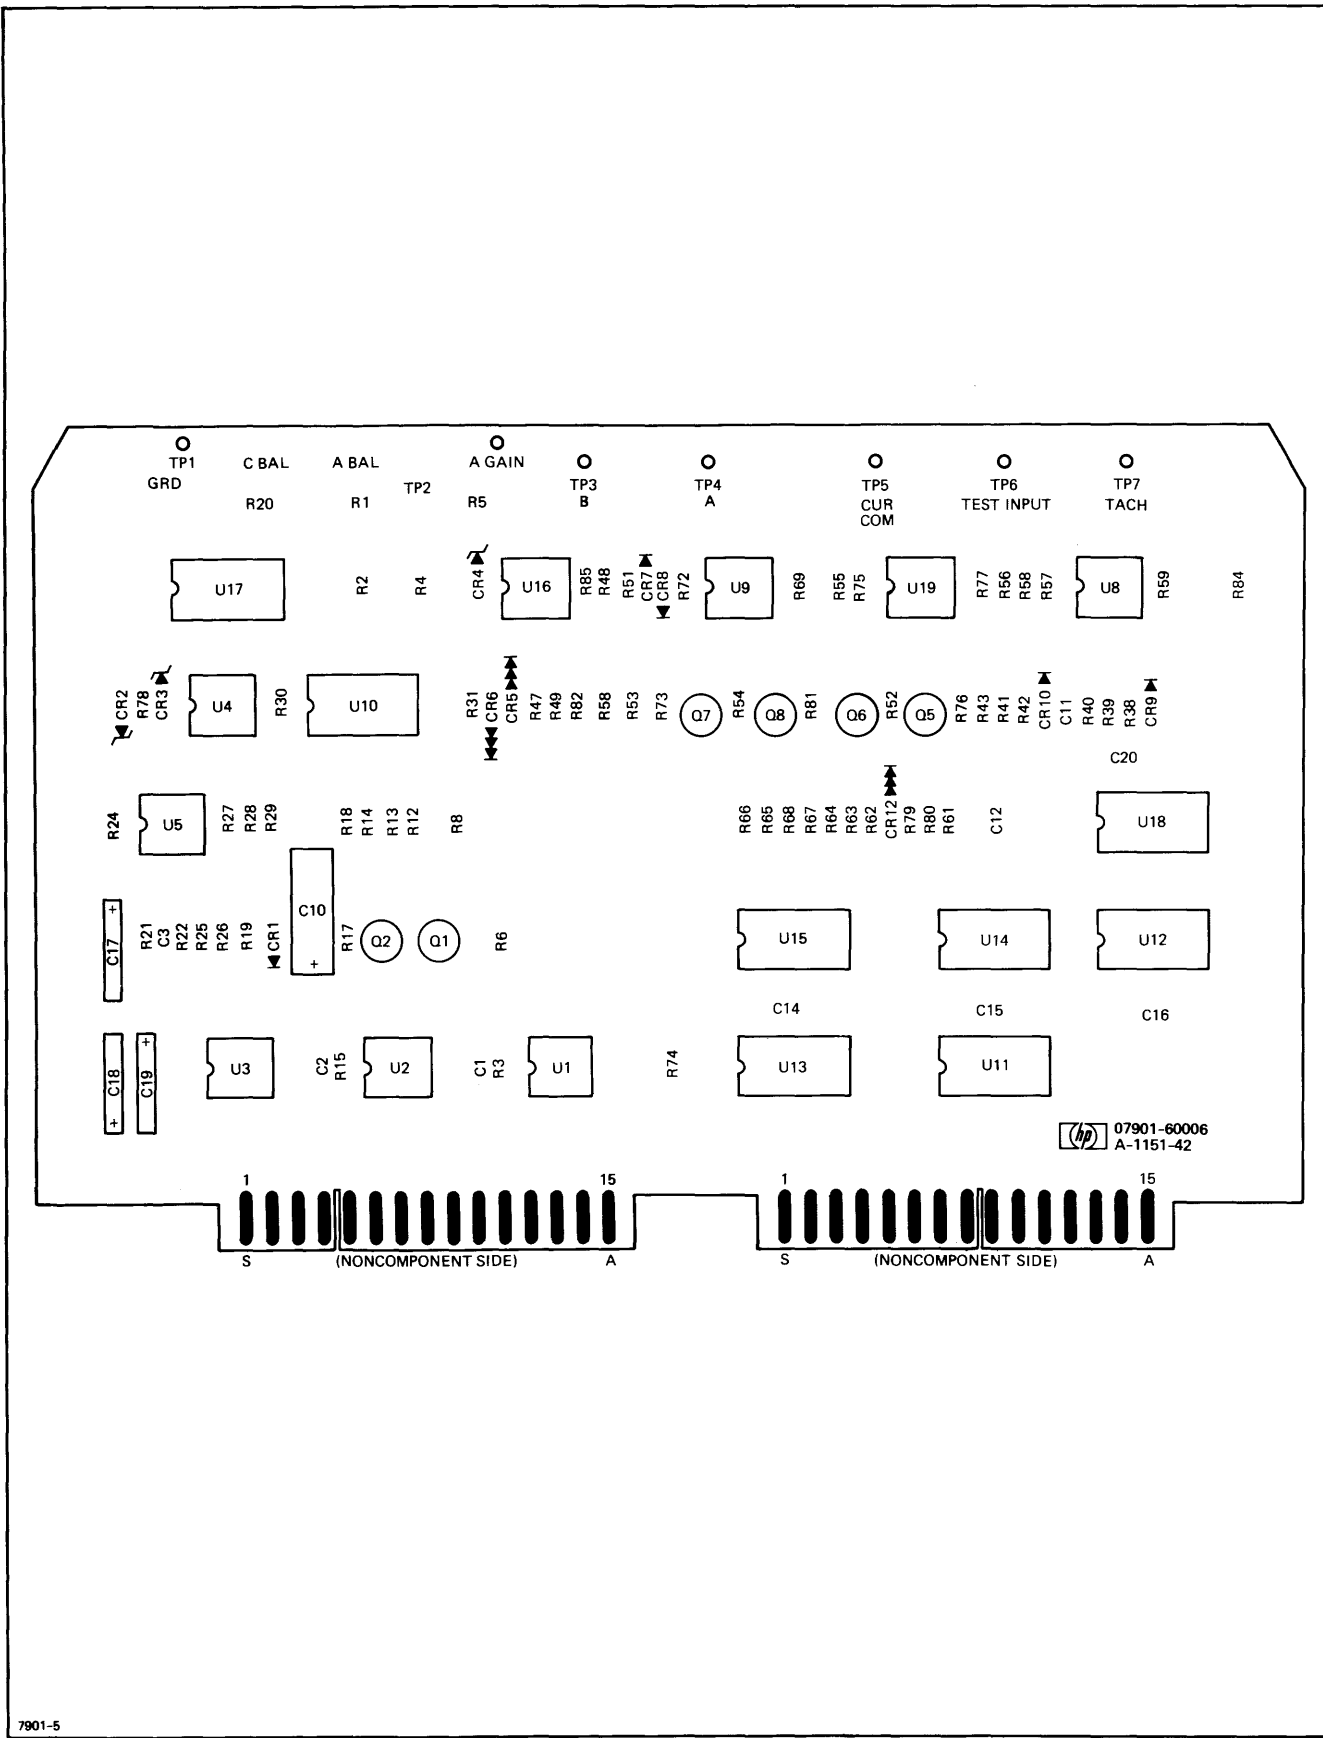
Encoder PC Assembly A9, Parts Location Diagram
